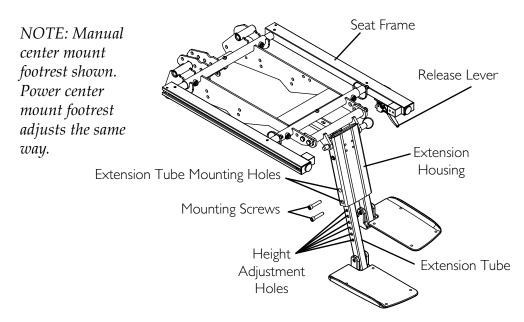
Adjusting the Height of the Center Mount Footrest - All Wheelchairs Except 2G Tarsys Systems
